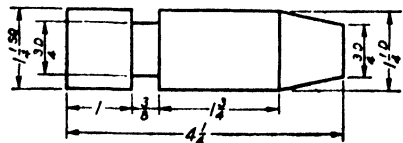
Use of "D" in dimensioning cylindrical shapes.
